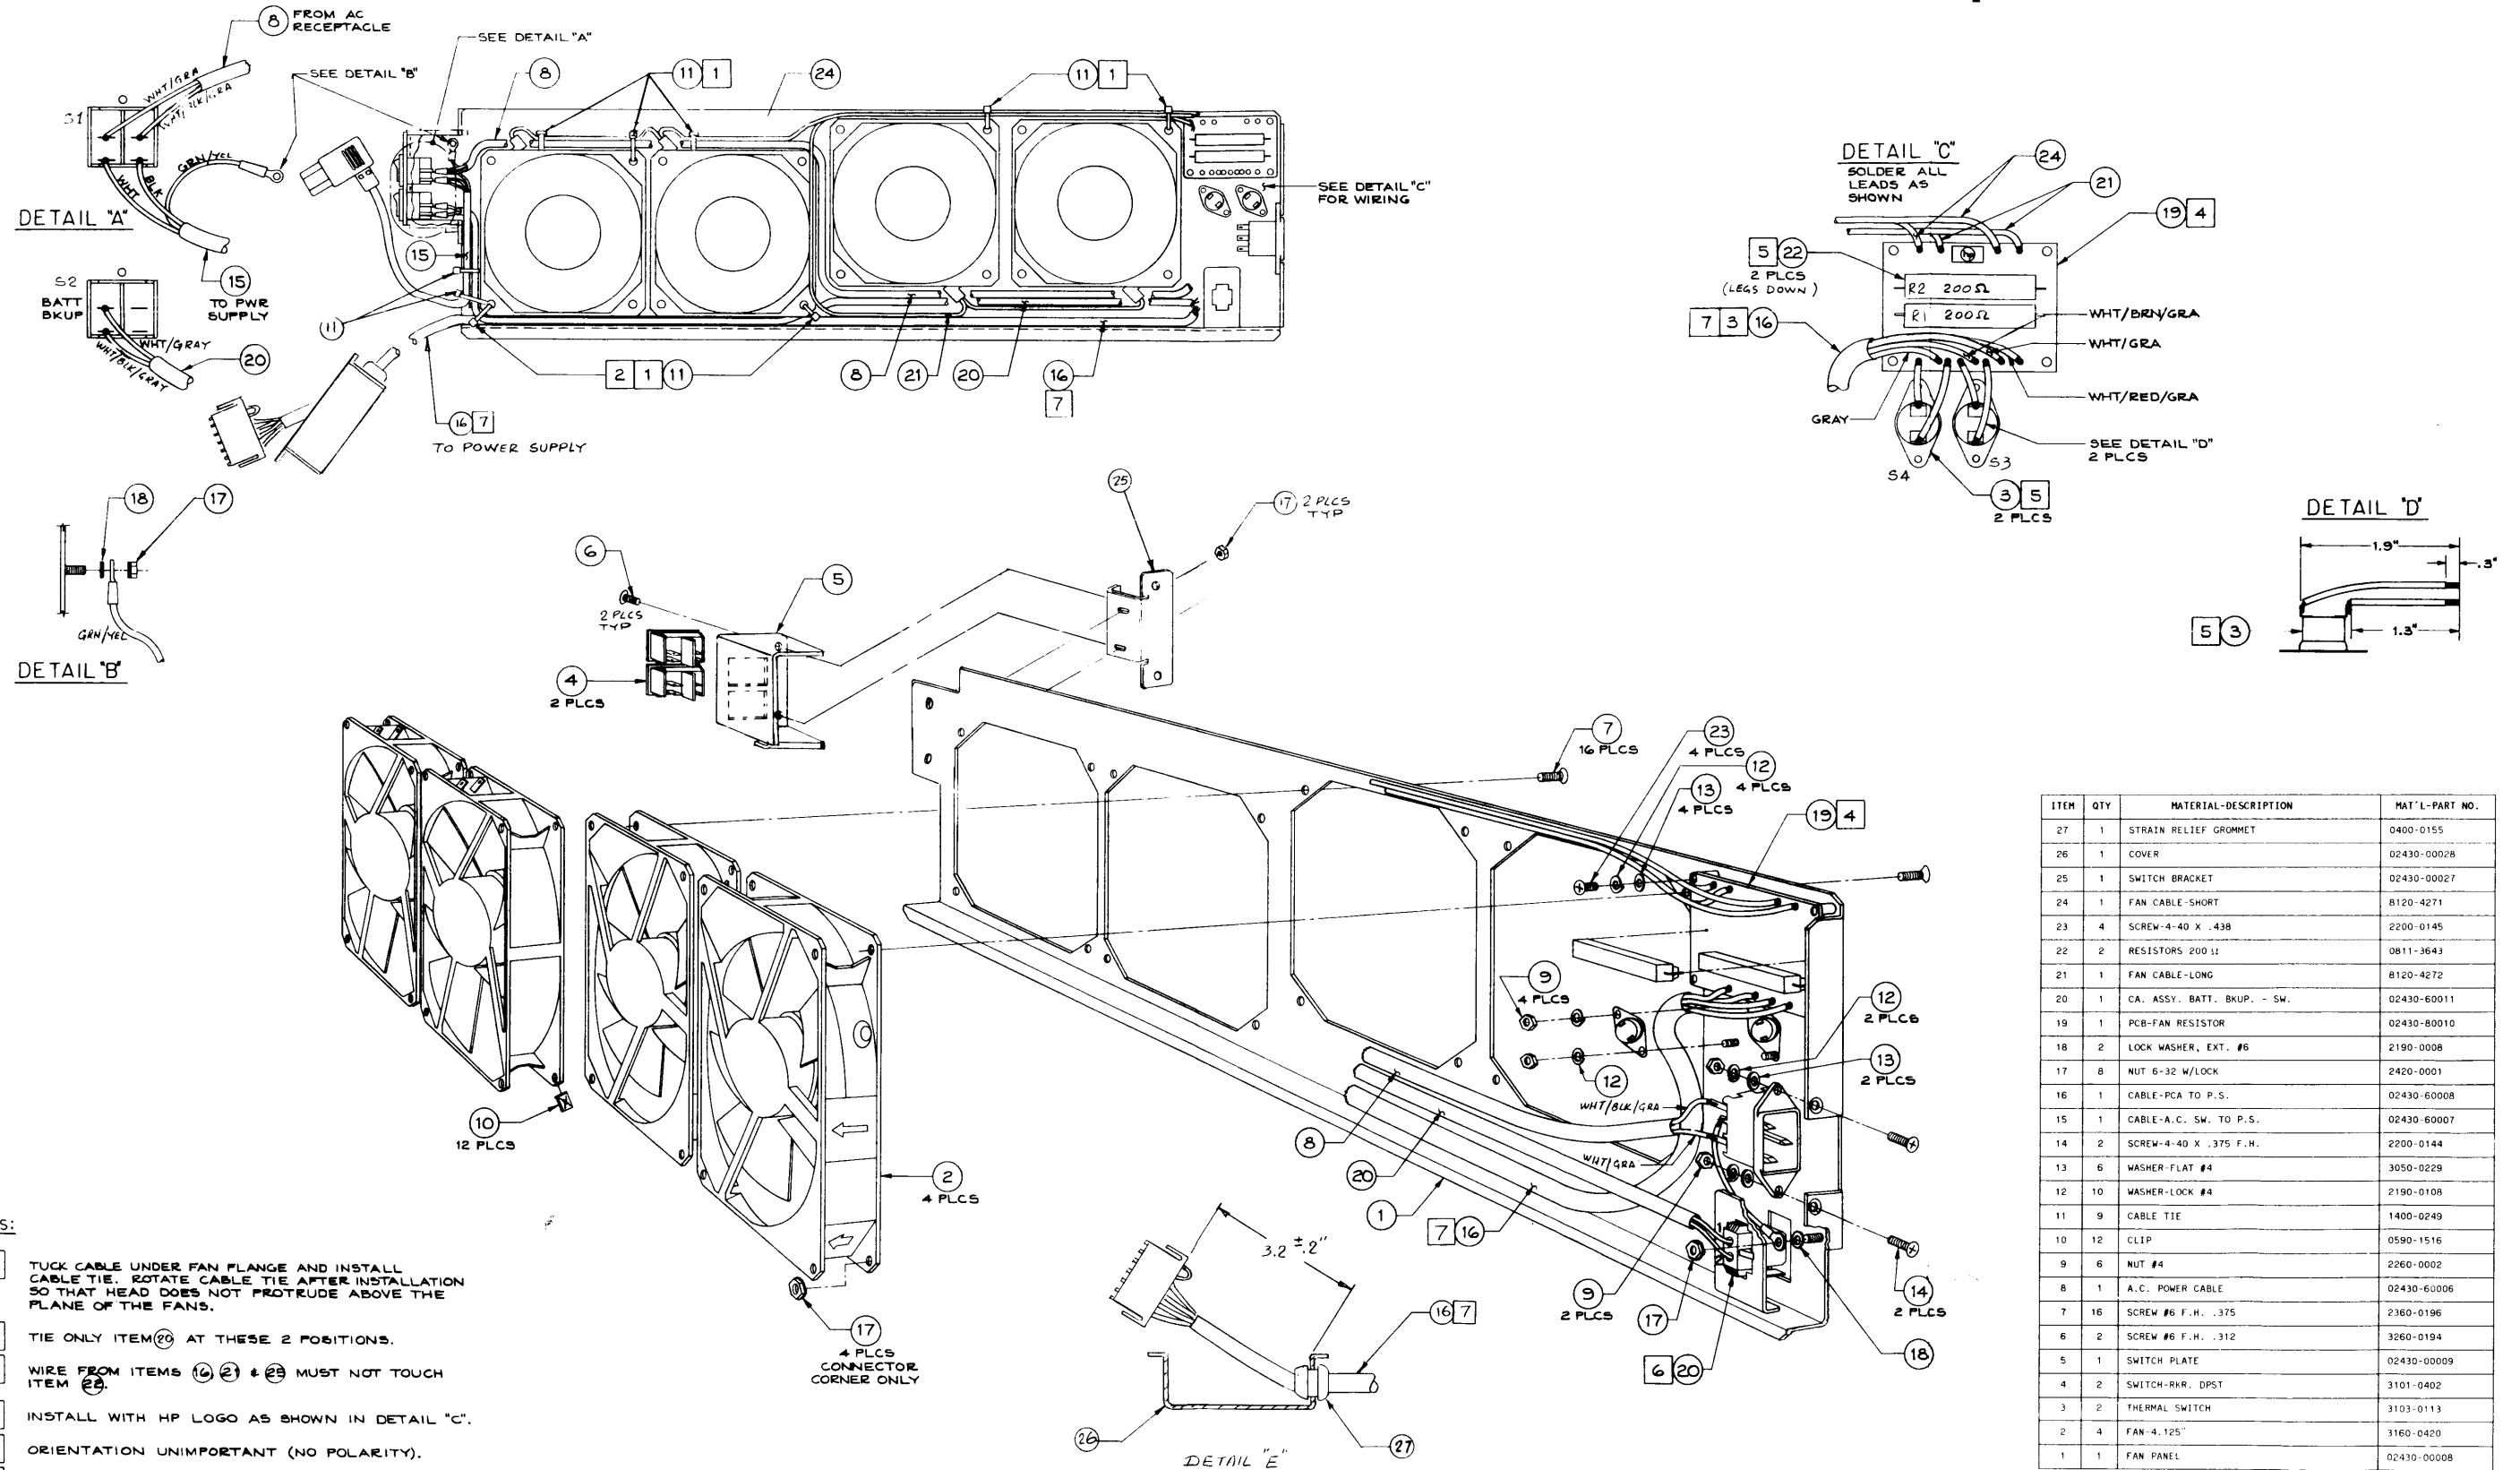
16-Slot Box Assembly Diagram (Sheet 3 of 4)
